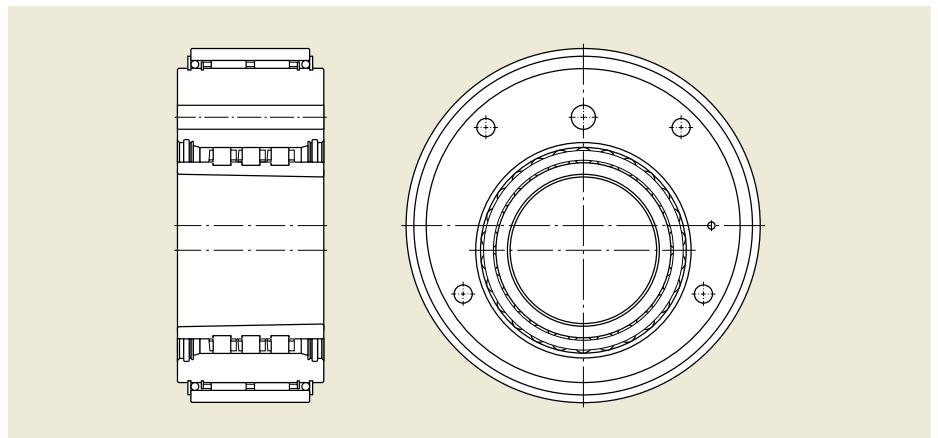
Some printing cylinder bearing units have one or two eccentric intermediate rings, each supported by a double row needle roller and cage assembly
